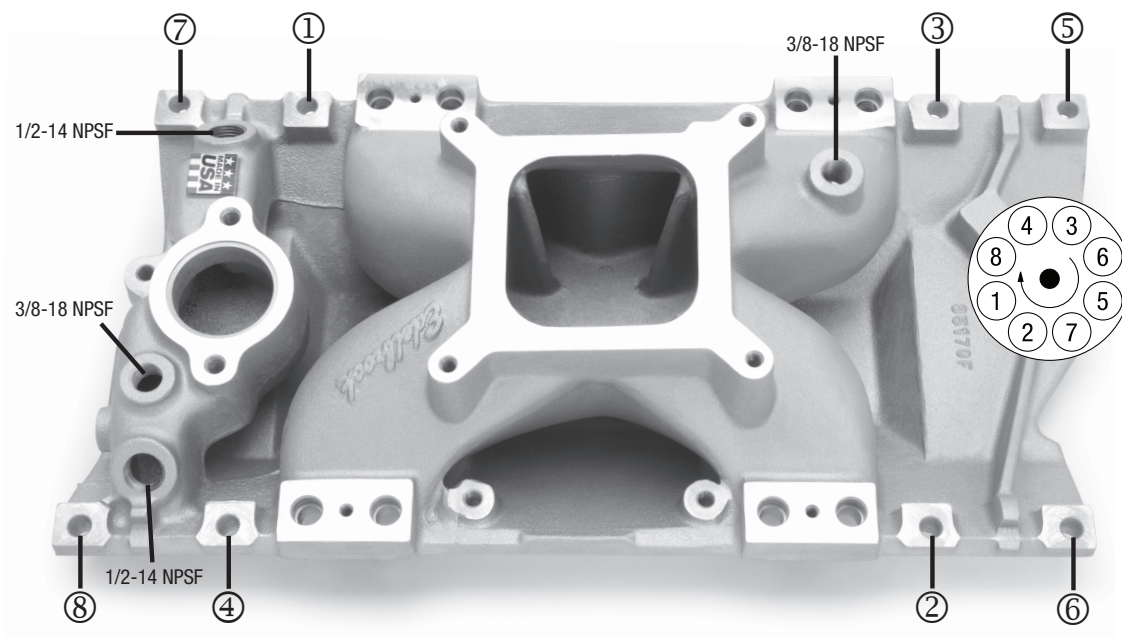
Vortec/E-Tec Manifold Bolt Torque Sequence
